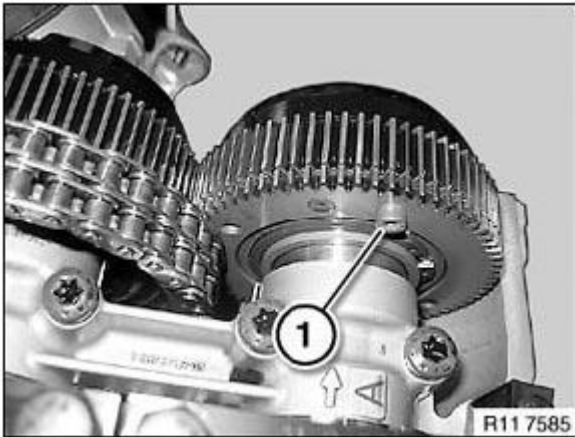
Aligning Gearwheels On Exhaust Adjustment Unit With Special Tool (11 5 370)
